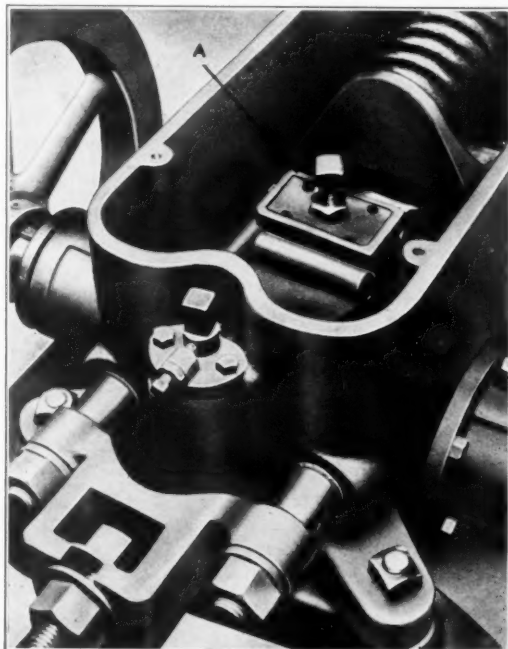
Head motion of a Wilfley table showing pitman lubrication holes at "A". All moving parts of this motion are splash lubricated by oil from the reservoir in the bottom of the housing.
